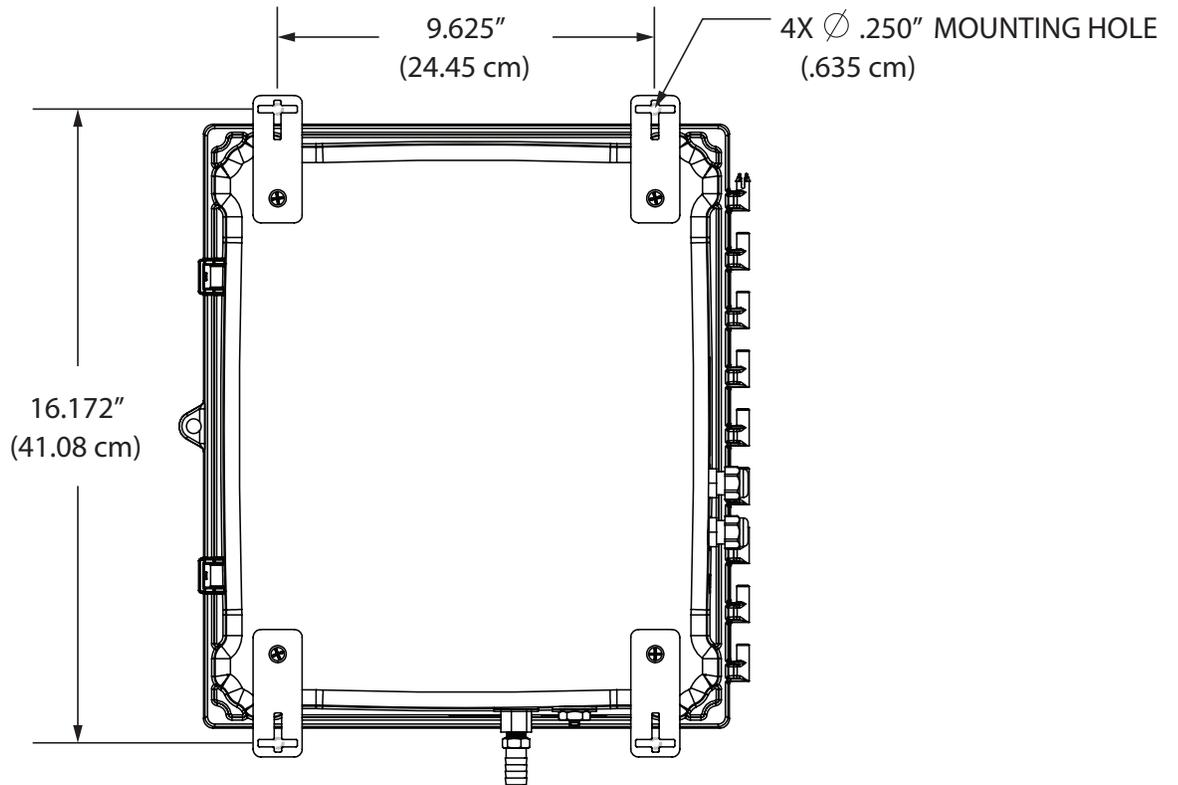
3017M mounting dimensions showing the mounting tabs connected to the enclosure
